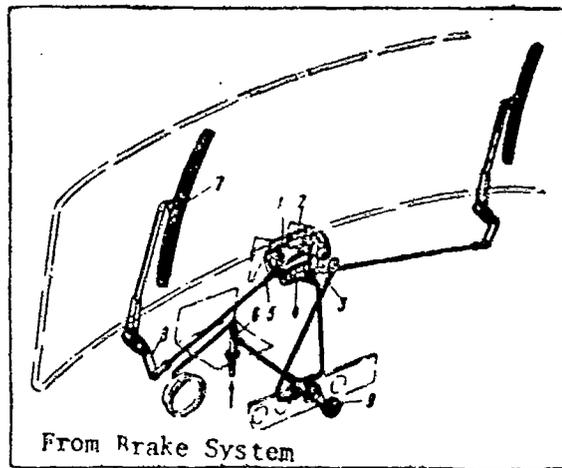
SL-440 Windshield Wiper: 1, pneumatic windshield wiper motor; 2, top cover; 3, two-arm lever; 4, valve distributor body; 5, windshield wiper drive arm; 6, air supply from pneumatic system; 7, wiper; 8, windshield wiper drive lever; 9, windshield wiper control button
